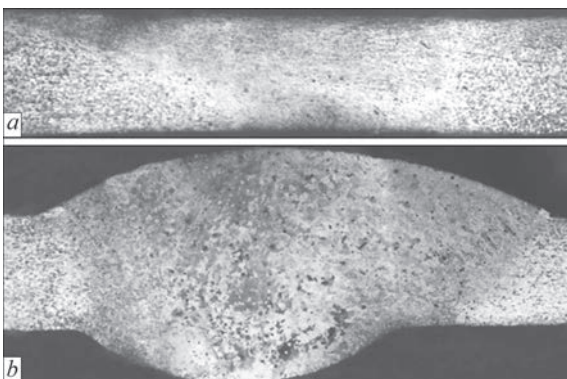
Cross-sections of welds of 2 mm 1201 alloy, produced by FSW (*a*) and argon TIG welding (*b*)
